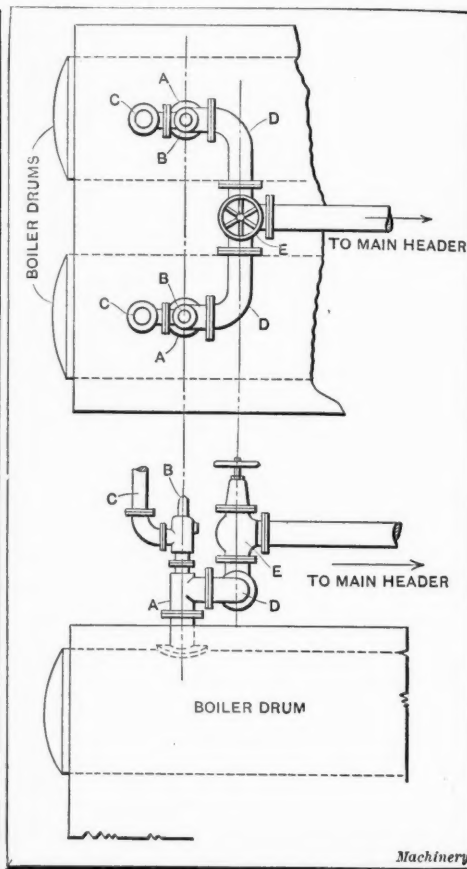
Cross-over Connection between the Steam Drums of a Large Water-tube Boiler
